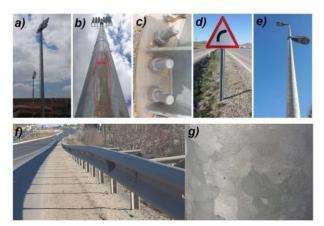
(a) A pole, (b) defect of galvanized part, (c) nuts and bolts, (d) a sign, (e) lampposts, (f) motorway barriers, and (g) a galvanized surface [9].
